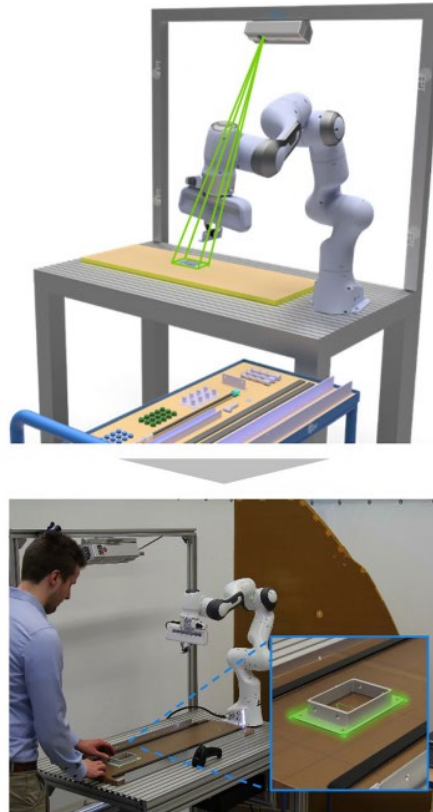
The Digital Production Process Twin of an assembly station for hybrid assembly of cabin interior components (based on [21])
